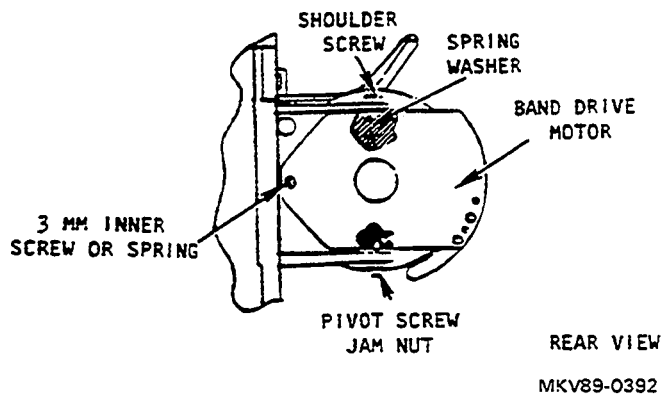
Removing the Inner Screw from the Band Pulley Motor
